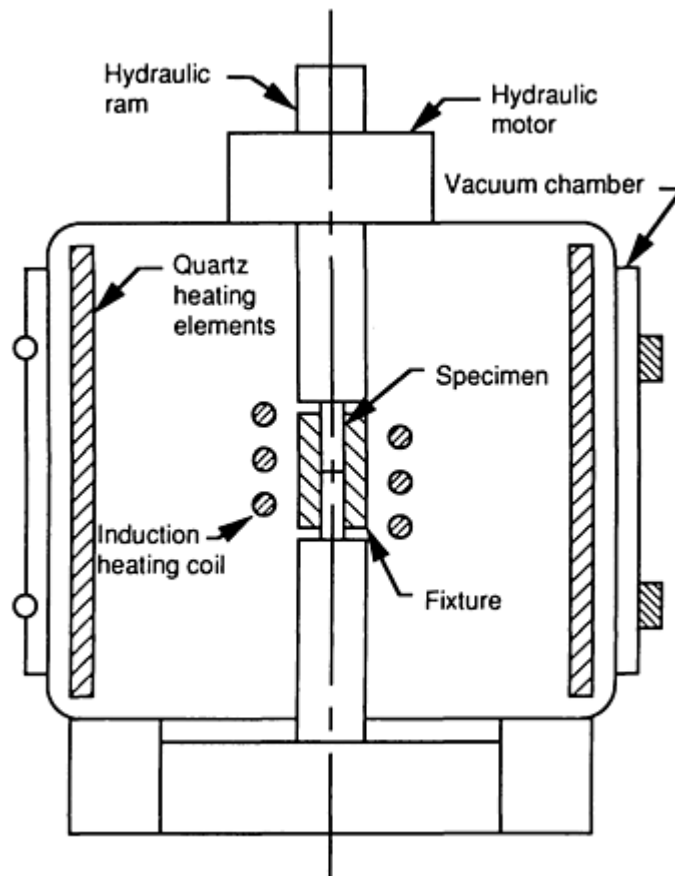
SCHEMATIC OF A TYPICAL VACUUM FURNACE USED FOR SOLID-STATE WELDING BY UNIAXIAL COMPRESSION. HEATING WOULD BE BY EITHER AN INDUCTION COIL OR RADIANT ELEMENTS AS SHOWN. THE CONSTRAINING FIXTURE SURROUNDING THE SPECIMEN IS USED TO PREVENT EXCESSIVE DEFORMATION FROM BASE-METAL YIELDING DURING APPLIED LOADING.
